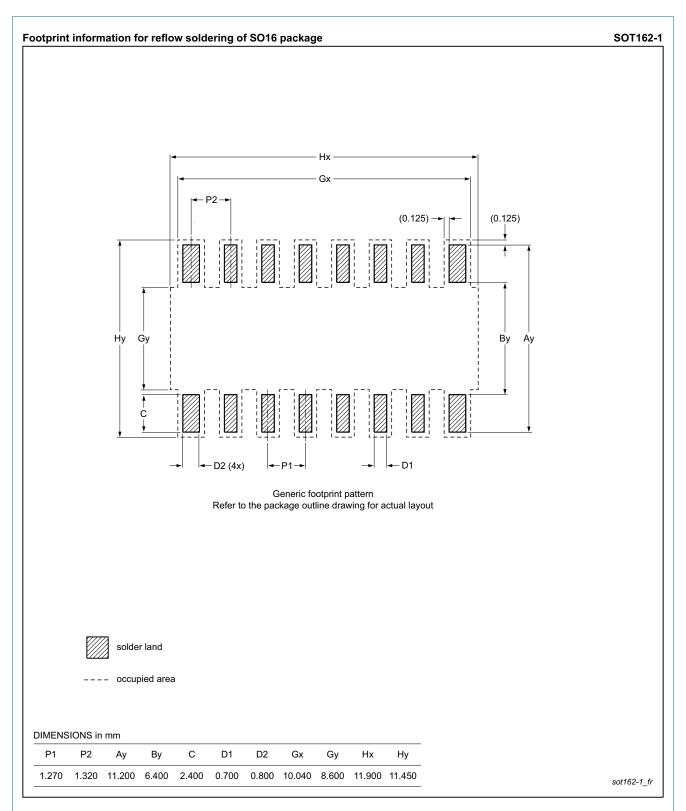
Footprint information for reflow soldering of SOT162-1 (SO16) of PCF2127T
